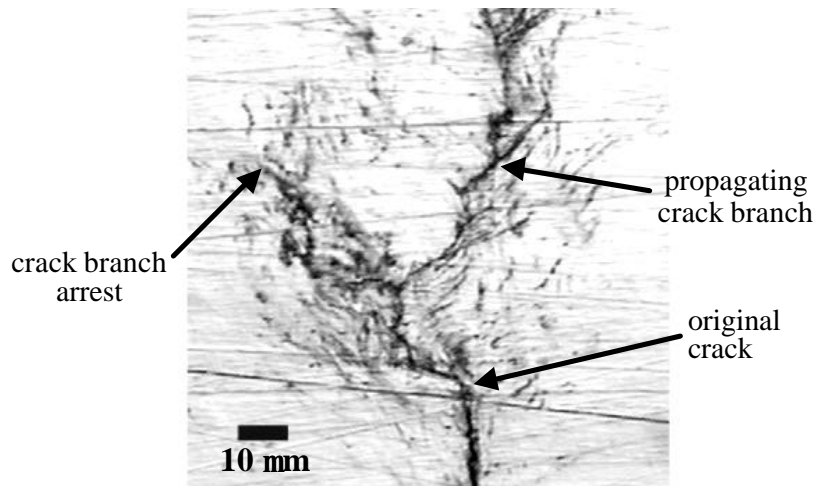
Crack branching on an SAE 4340 ESE(T) specimen.
